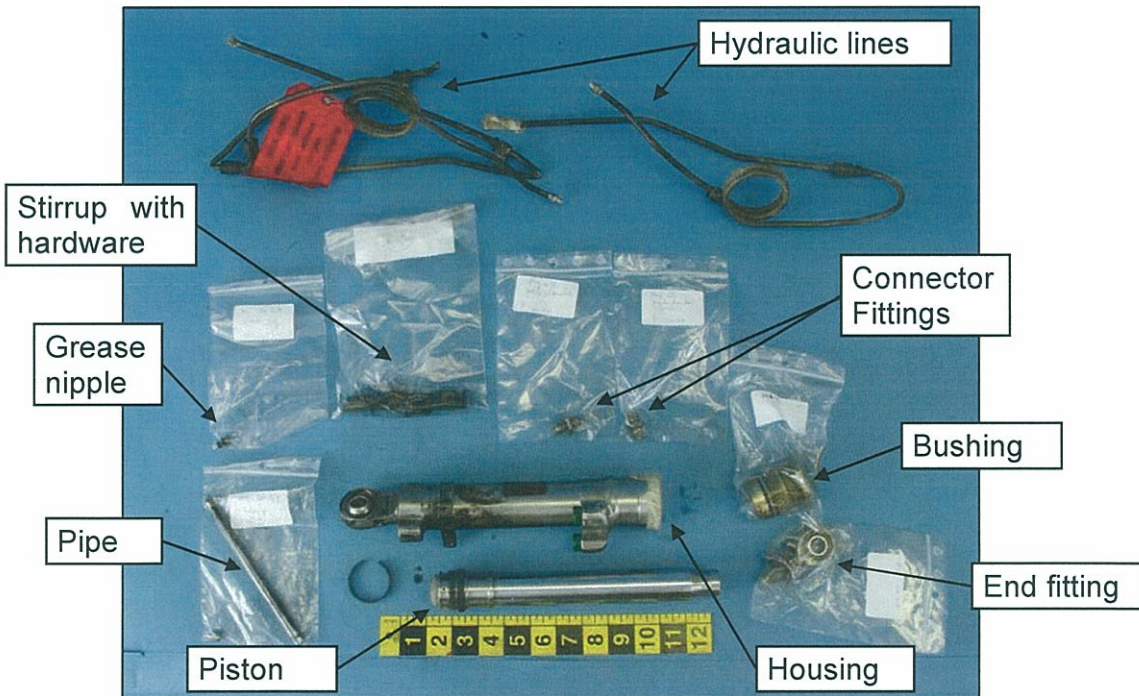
Overall view of the left inboard flap actuator and hydraulic lines.
